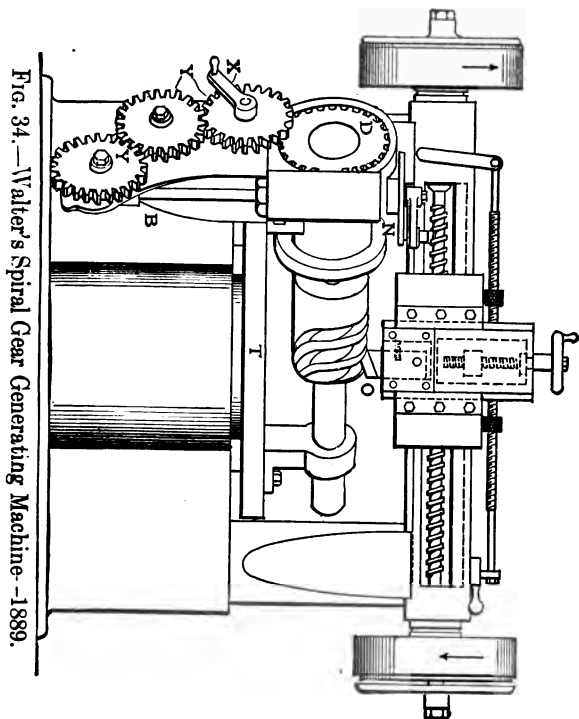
Valter's Spiral Gear Generating Machine—1889.
